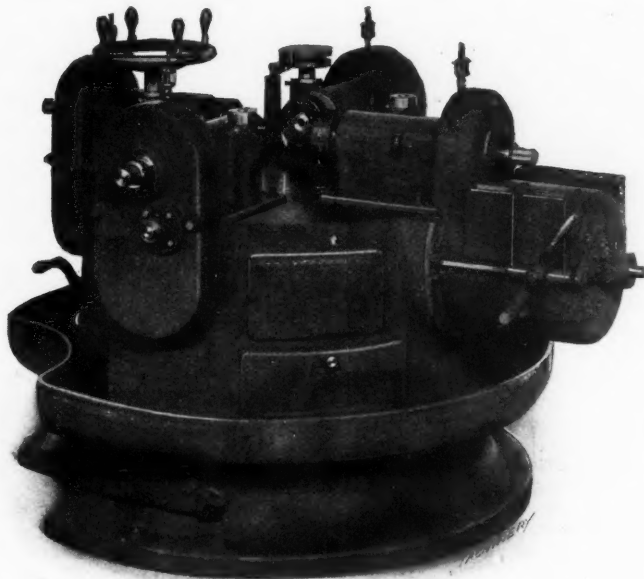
Reed-Prentice Four-way Drilling Machine for drilling Universal Joint Rings
